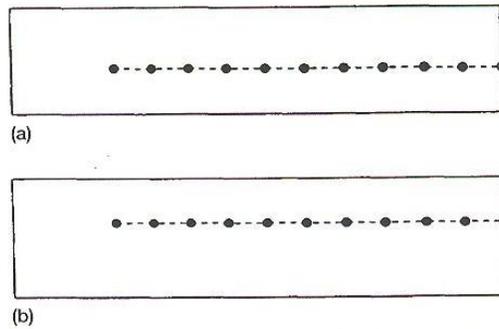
Path of contact caused by $\Delta\gamma = 3$ arc min. (a) Modified pinion tooth surface. (b) Gear tooth surface.
